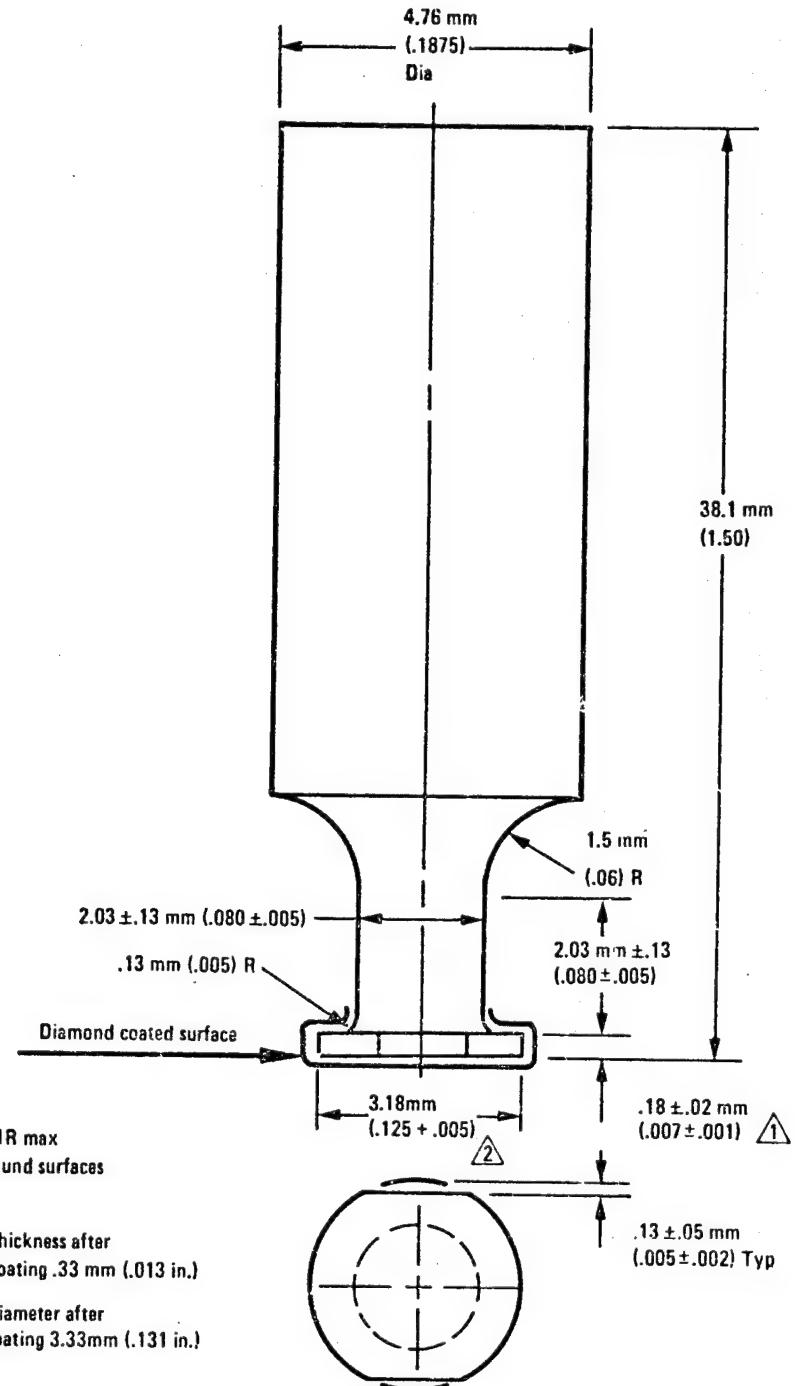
Diamond coated Woodruff style cutter used to generate Chipout type hole defects.
